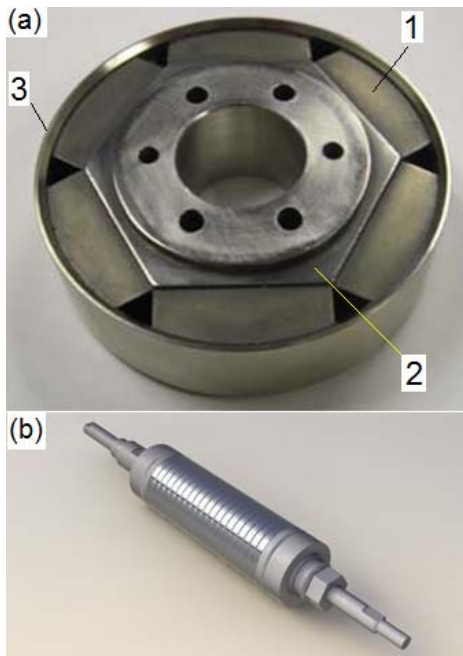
PM rotor of segmented construction of a six-pole high speed PM brushless motor with metal retaining sleeve: (a) single segment; (b) rotor stacked with 20 segments. 1 — PM, 2 — rotor core, 3 — retaining sleeve (can). Photo courtesy of Electron Energy Corporation, Landisville, PA, USA.
